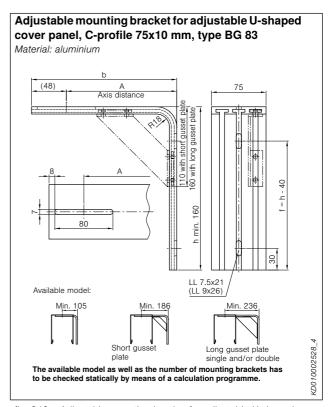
Adjustable mounting bracket for adjustable U-shaped cover panel
